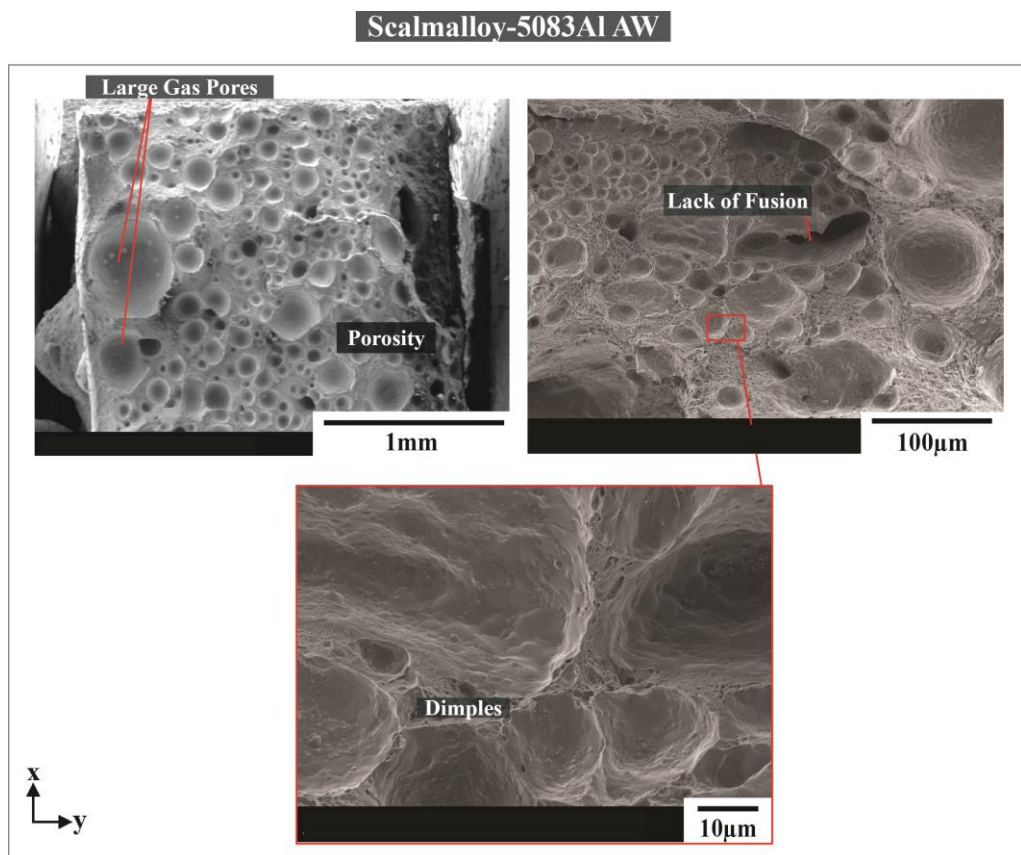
Fracture surfaces and fractured samples for Scalmalloy-5083Al as welded joint
